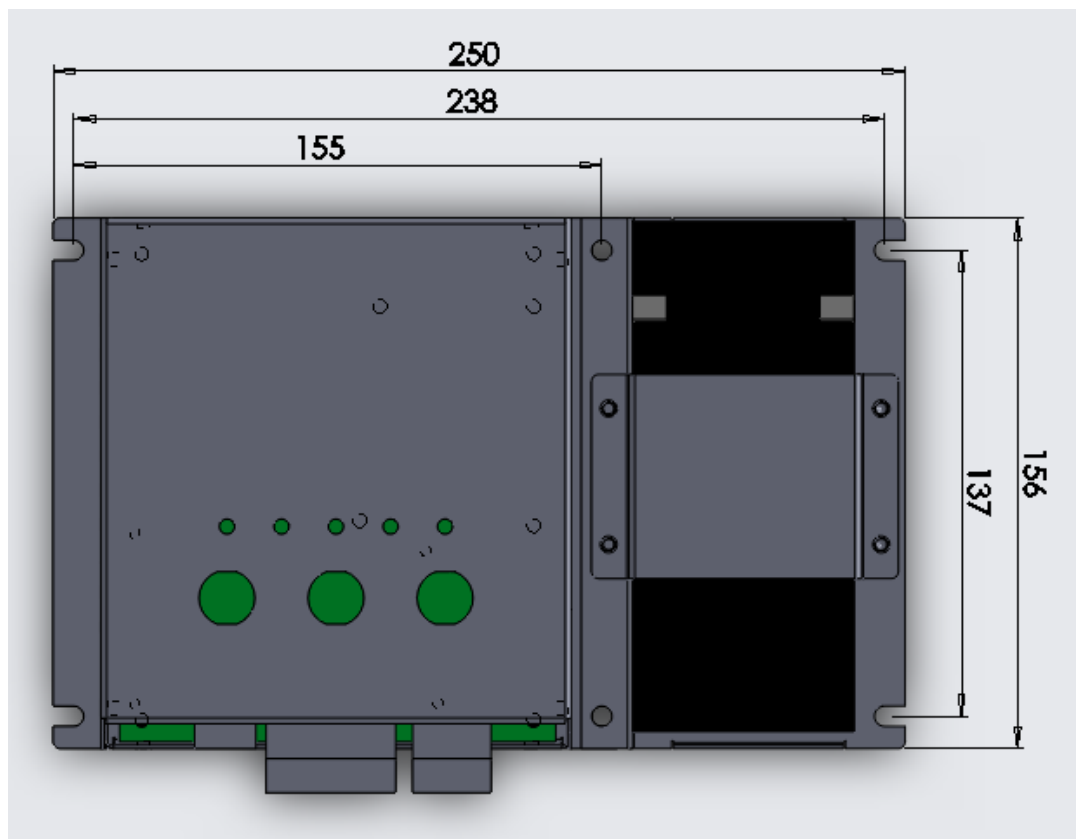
EXTERIOR DIMENSION FRONT VIEW (SJT—EPB/D 110PF)
